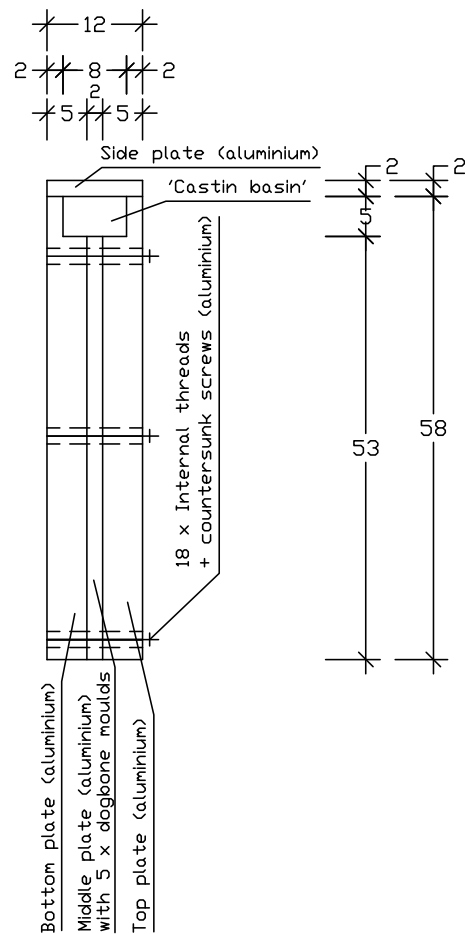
Technical drawing of the moulds used for preparing five dog-bone shaped tension samples (narrow part $16 \times 4 \text{ mm}$) (Page 01).
